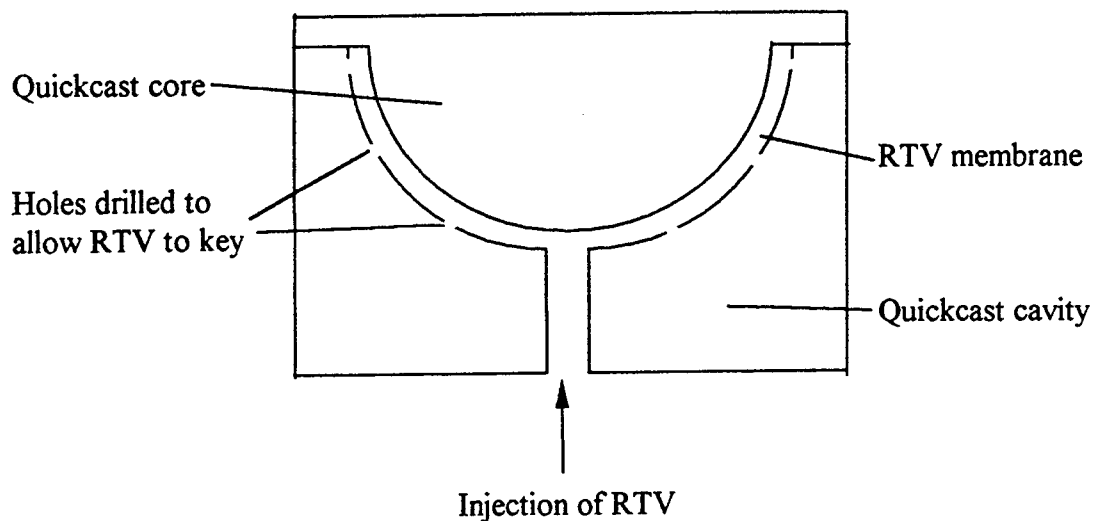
Cross section diagram showing how an RTV silicone rubber membrane mould is made
